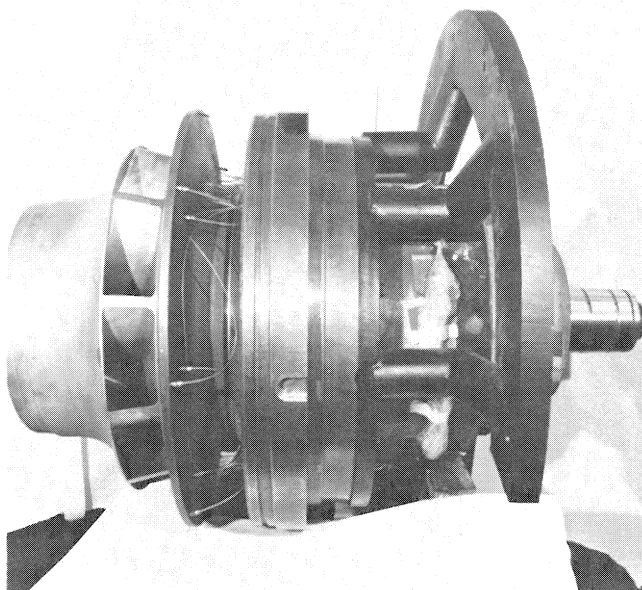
Rotating Element, Fully Assembled in Bearing Housing with Special Lifting Tool.
